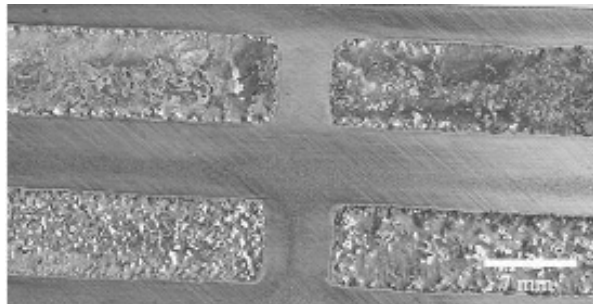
Face view after laser alloying with tungsten carbide, X40CrMoV5-1 steel, laser power of 1.2-2.3 kW
